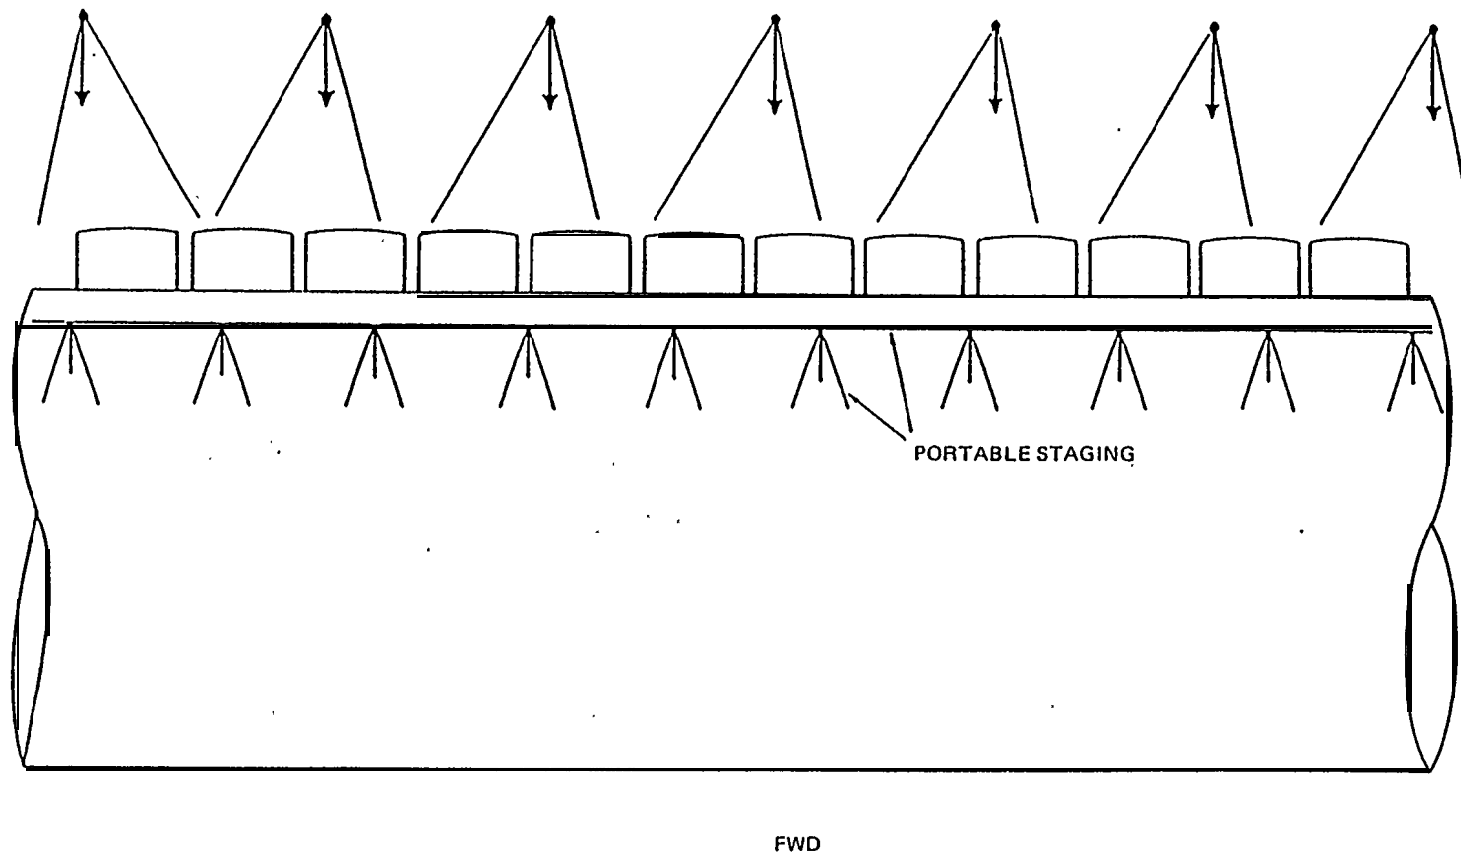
Longitudinal Section Showing Longitudinal Spacing of Photographs
